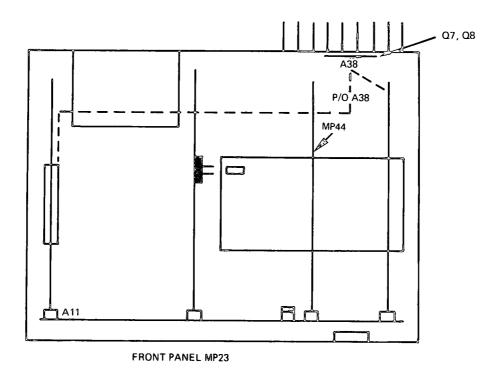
2. Location of changed parts and assemblies for 8015A Option 001
